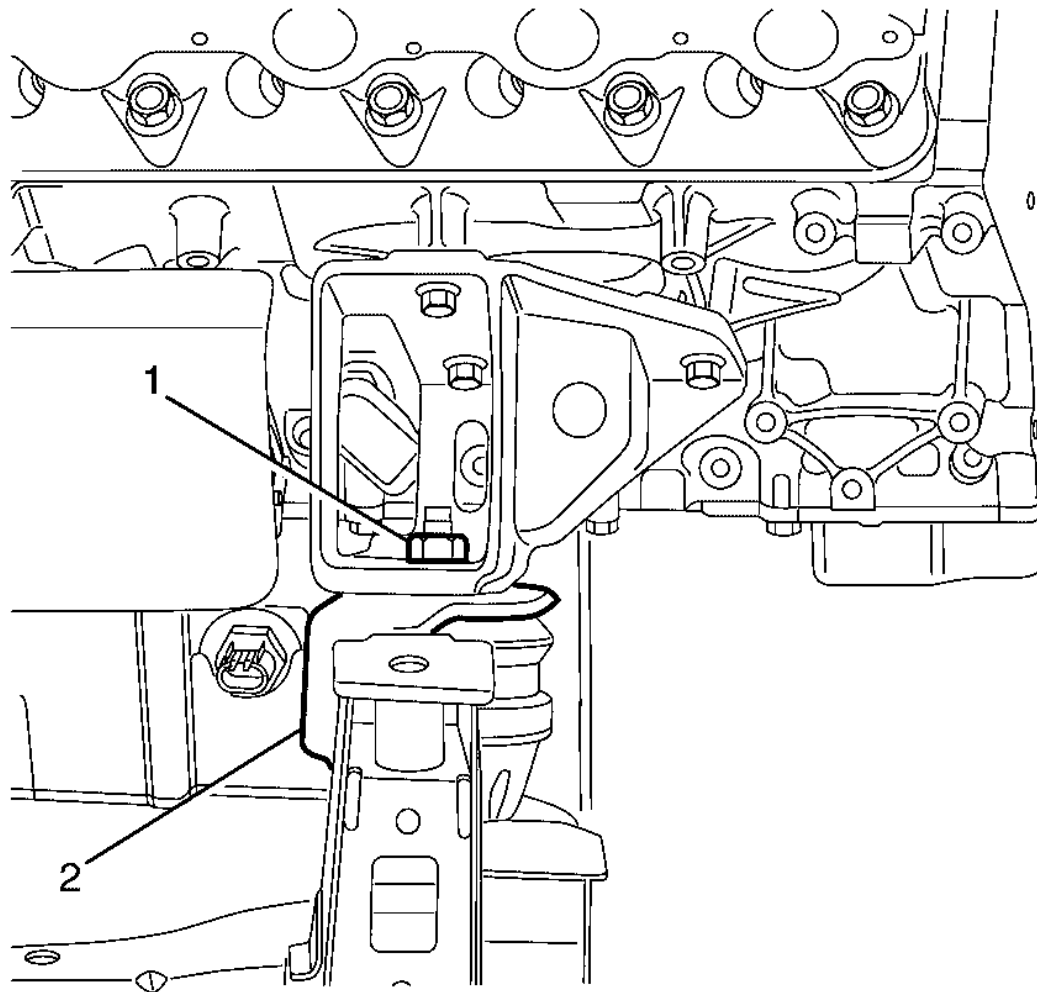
Identifying Right Side Engine Mount To Engine Mount Bracket Retaining Nut
